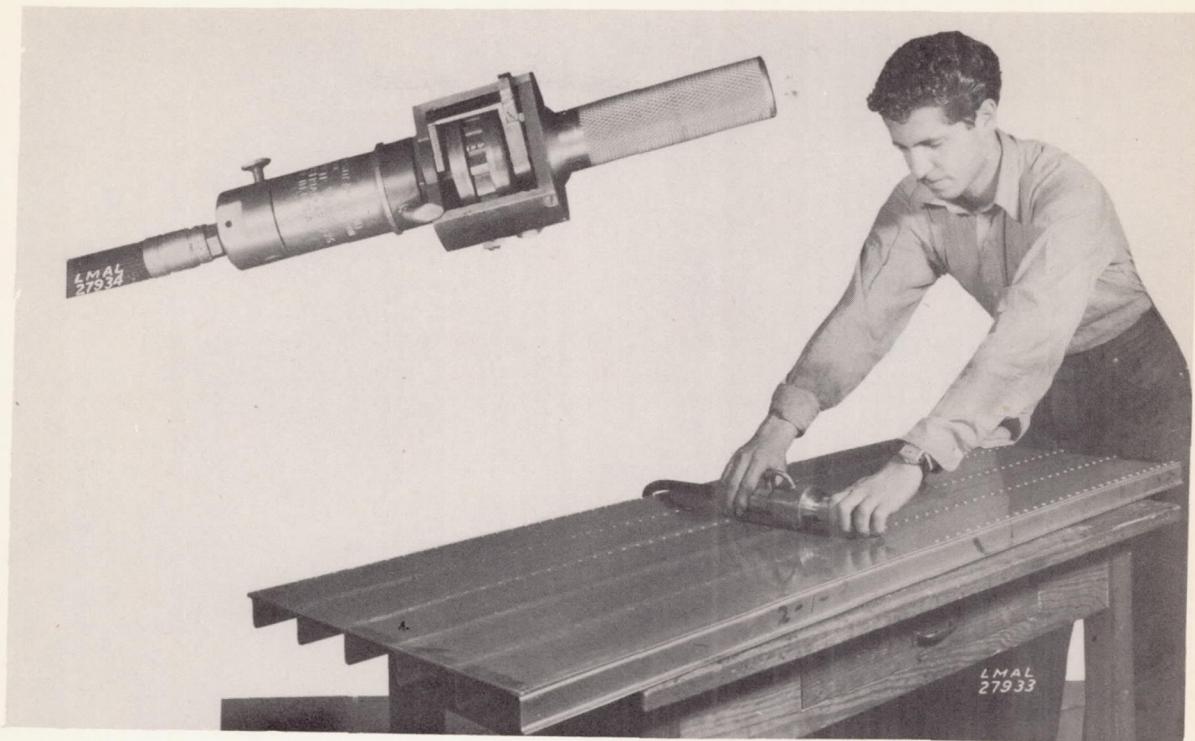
Rotary-milling tool for removing the protruding portion of the rivet head.
